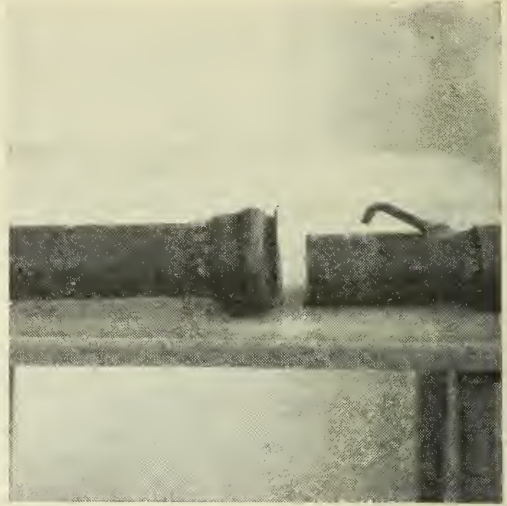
A Pierce coupler attached to short lengths of light steel pipe. In use, the coupler is welded to the portable pipe.
